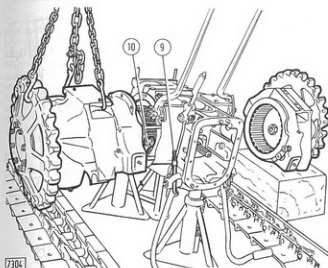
Removing (or Refitting) Bevel Drive Case
